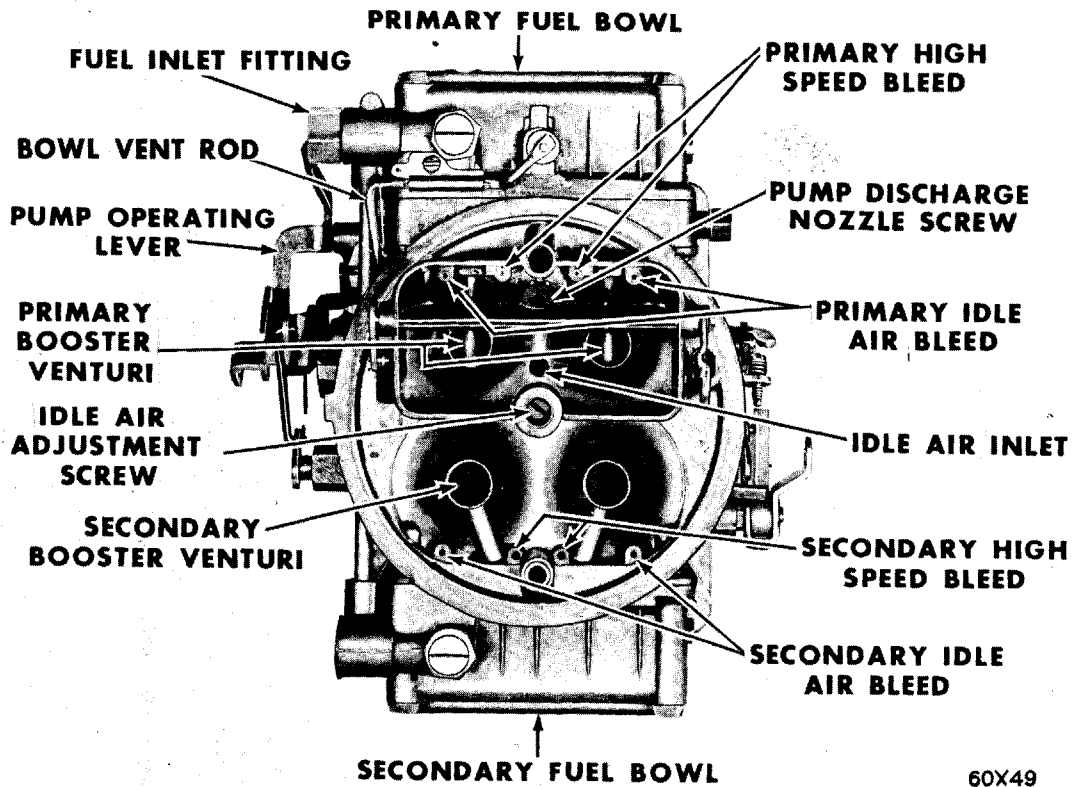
Carburetor Assembly (R2052A and R1971A) Top View
